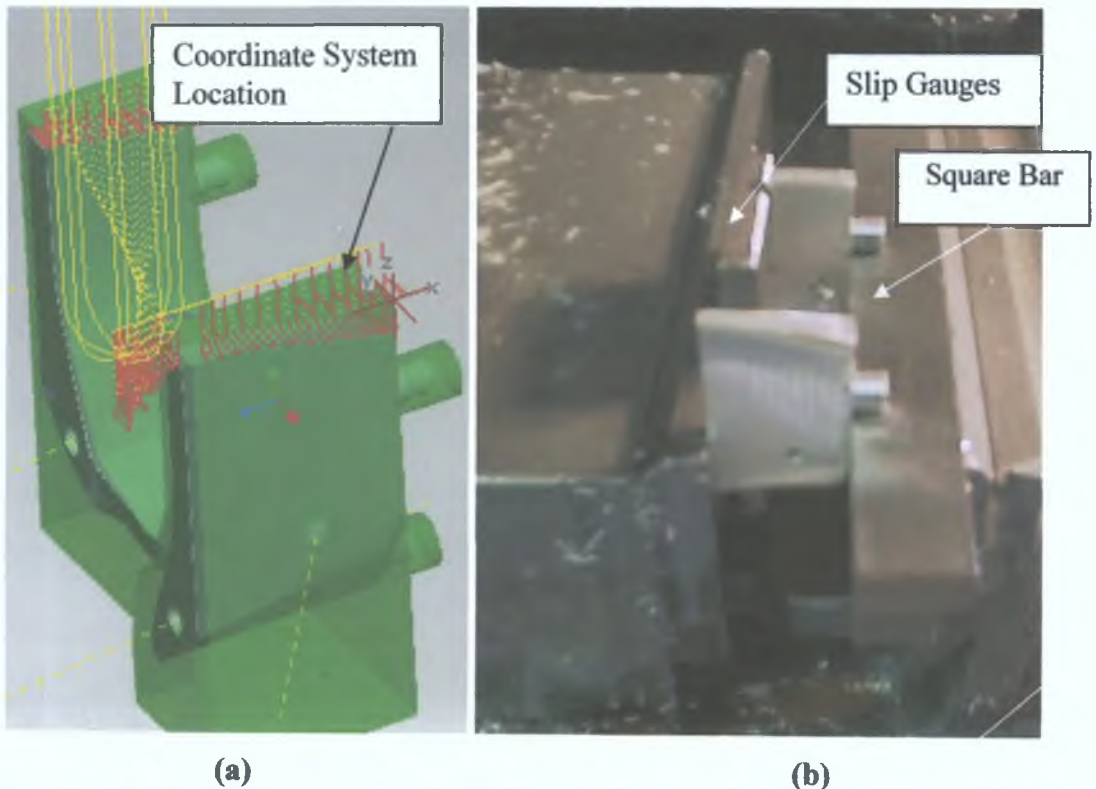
Profile Mill Sequence 4 (a) ProEngineer Tool Path. (b) Machined Work Piece.
